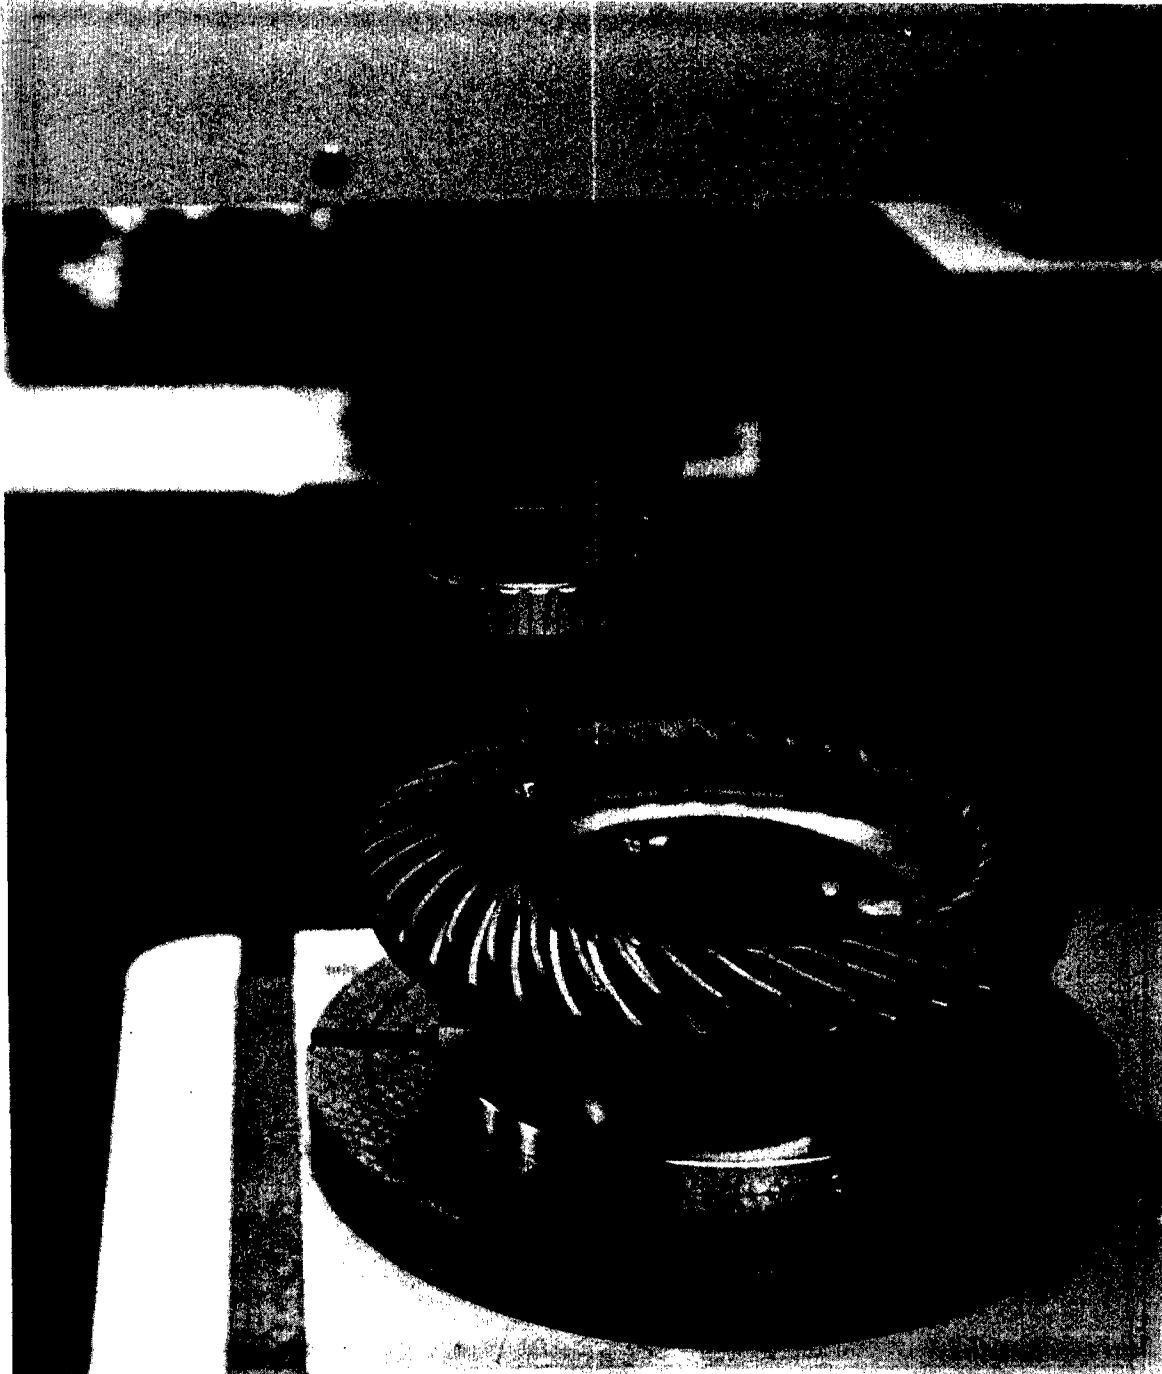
Measuring Forged Gear Tooth Form on Zeiss Machine
